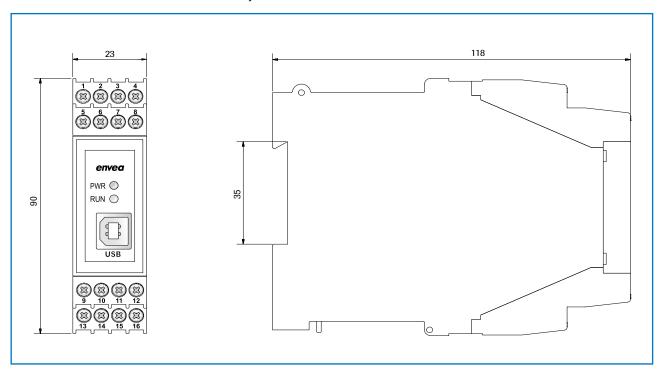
Dimensions of the MSE 300 in the DIN Rail housing
